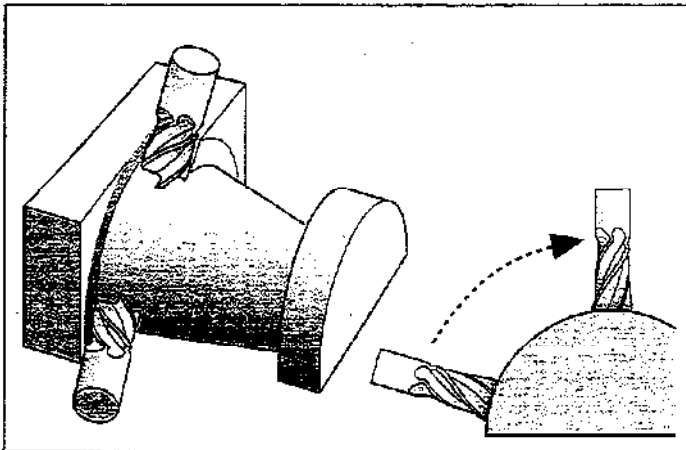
Example of simultaneous movement of more than three axes: machining a 3D surface with an end mill
